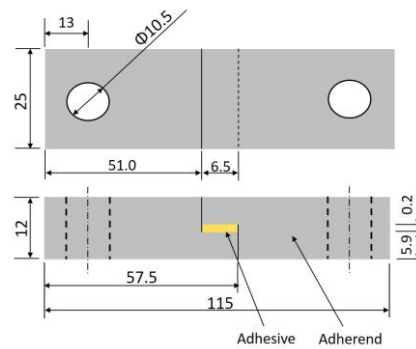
Configuration of Thick Adherend Shear Test specimen [mm]
